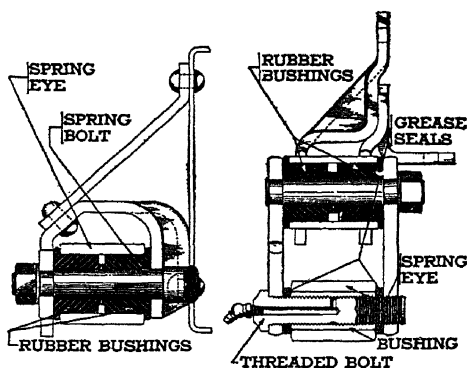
Rubber Bushings Used on American Packard Cars.
